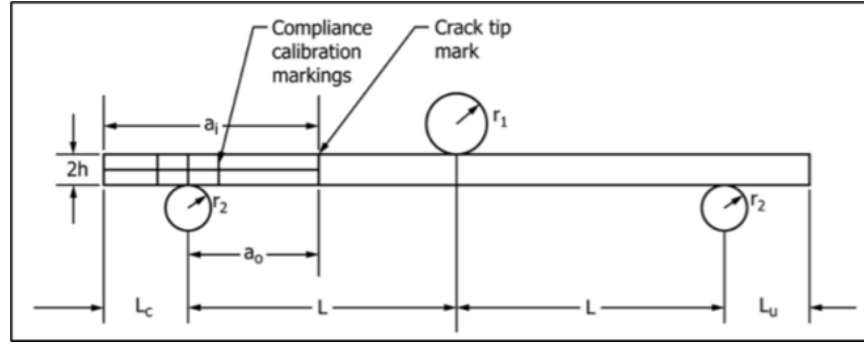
ENF specimen, fixture, and dimensions [91].
